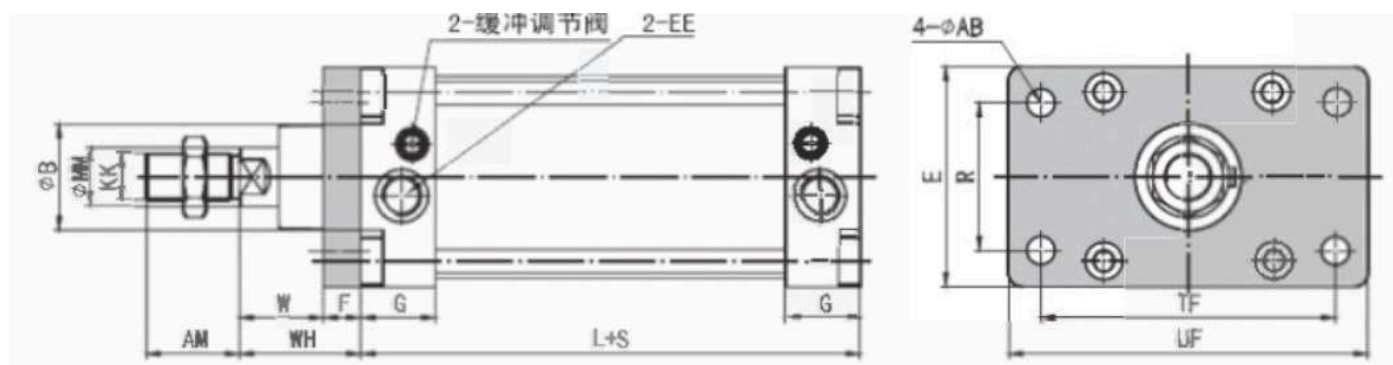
Side elevation with rod and port dimensions, and front mounting face (E, R, TF, UF, 4 × ØAB).
